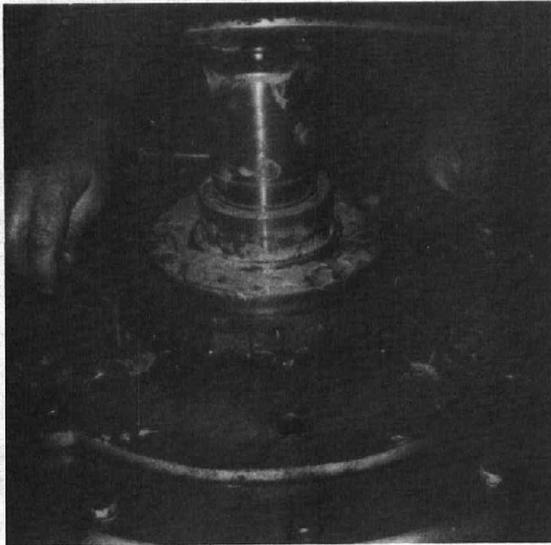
Using supplied bolt jacks to lift the cap that covers the precision bearing.
